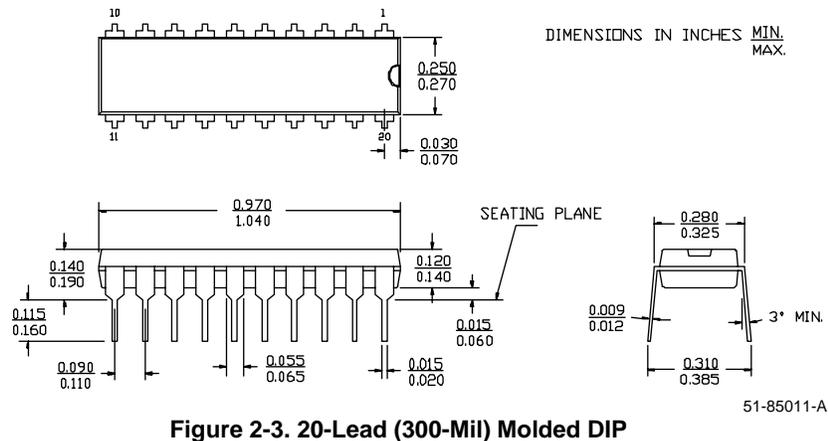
20-Lead (300-Mil) Molded DIP
